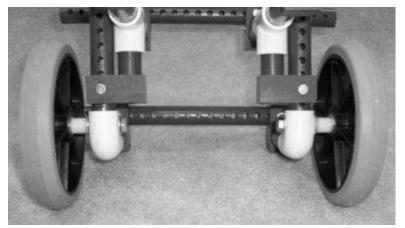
Wheels Assembled and Attached to Wheelchair Frame.
